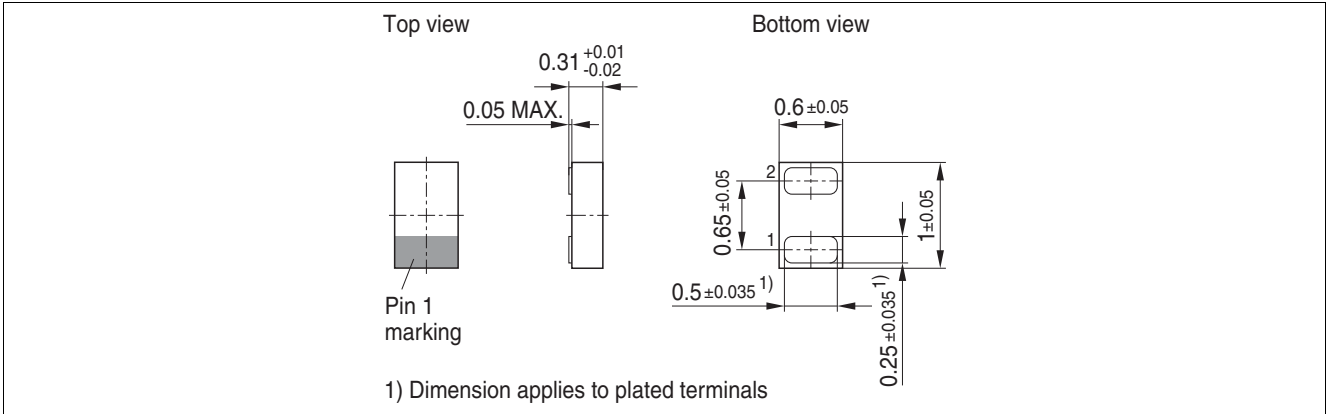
TSLP-2-20 Package outline (dimension in mm)
